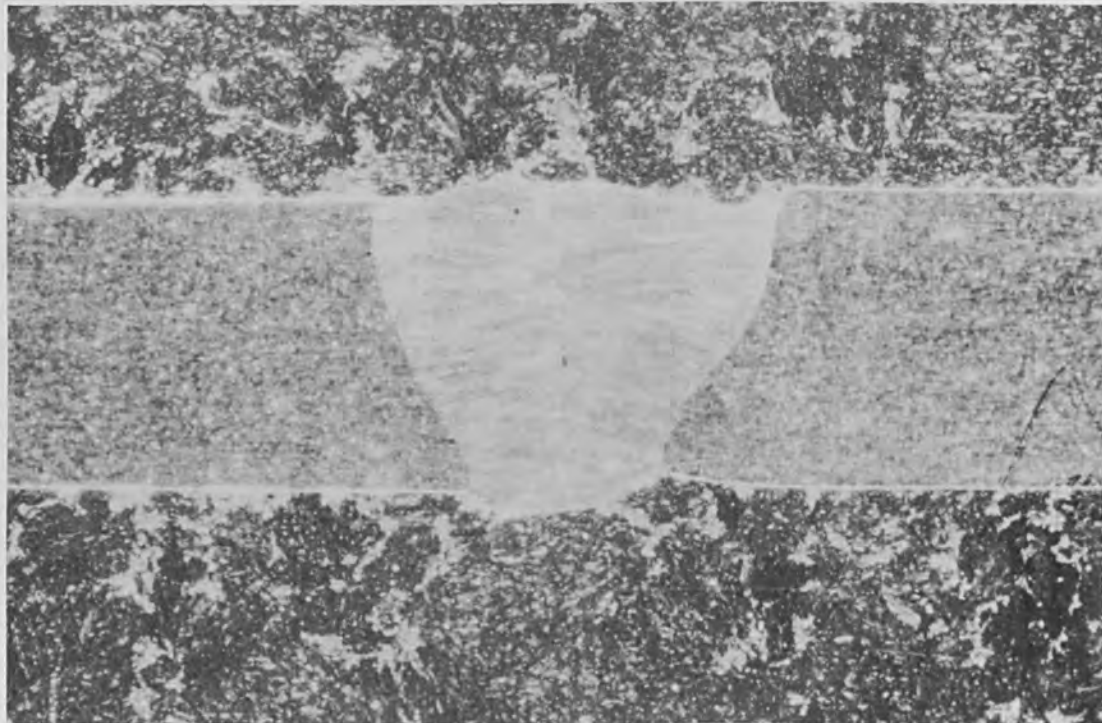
Electron-beam butt weld. (Power, 945 W; speed, 36 in./min; material, 304 SS; magnification, 20 x.)
